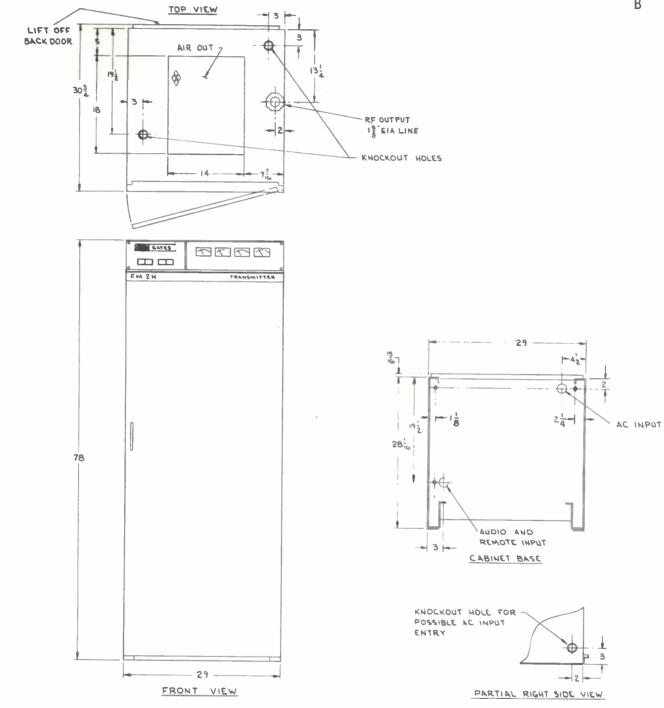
INSTALLATION LAYOUT FM-2.5K 838 4123 001
